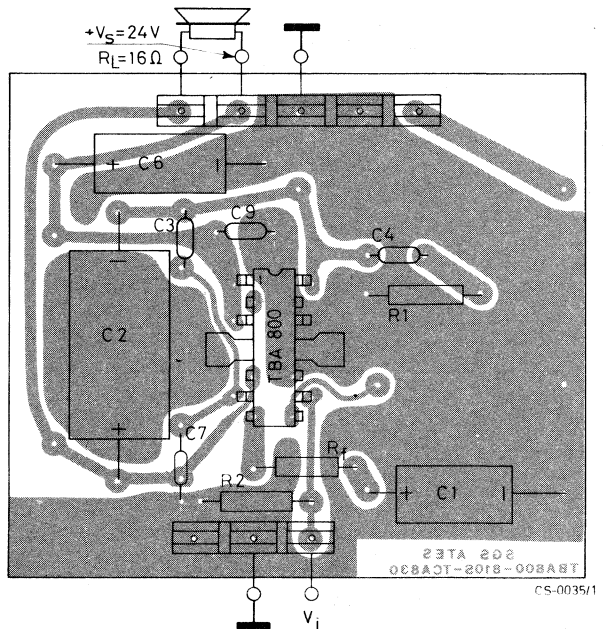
P.C. board and component layout of the fig. 10 circuit (1:1 scale)
